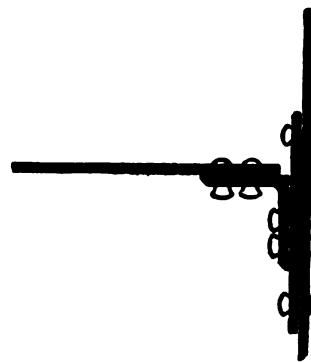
Showing Bulkhead Liner and Angle Connection to Shell.
